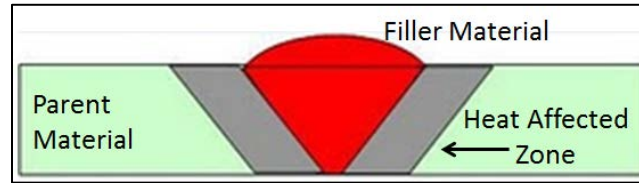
Zones of a TIG weld showing parent material, HAZ, and filler material.
